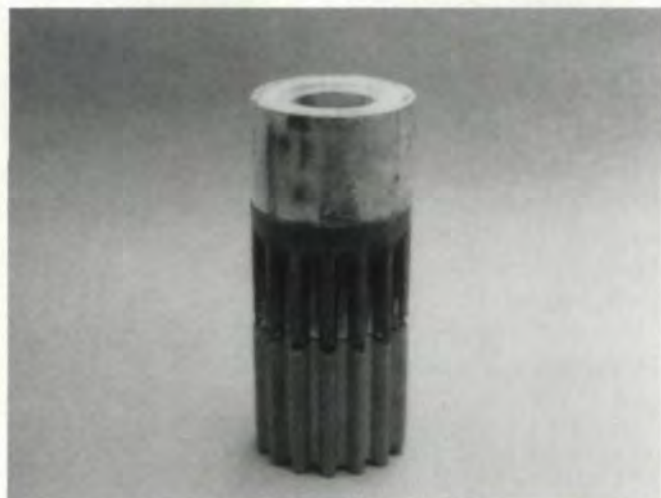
Sequence of Parts For Extruding Spur Gears. Billet is on Top, Partially Formed Gear is in the Middle, and Complete Extruded Gear is on the Bottom.
